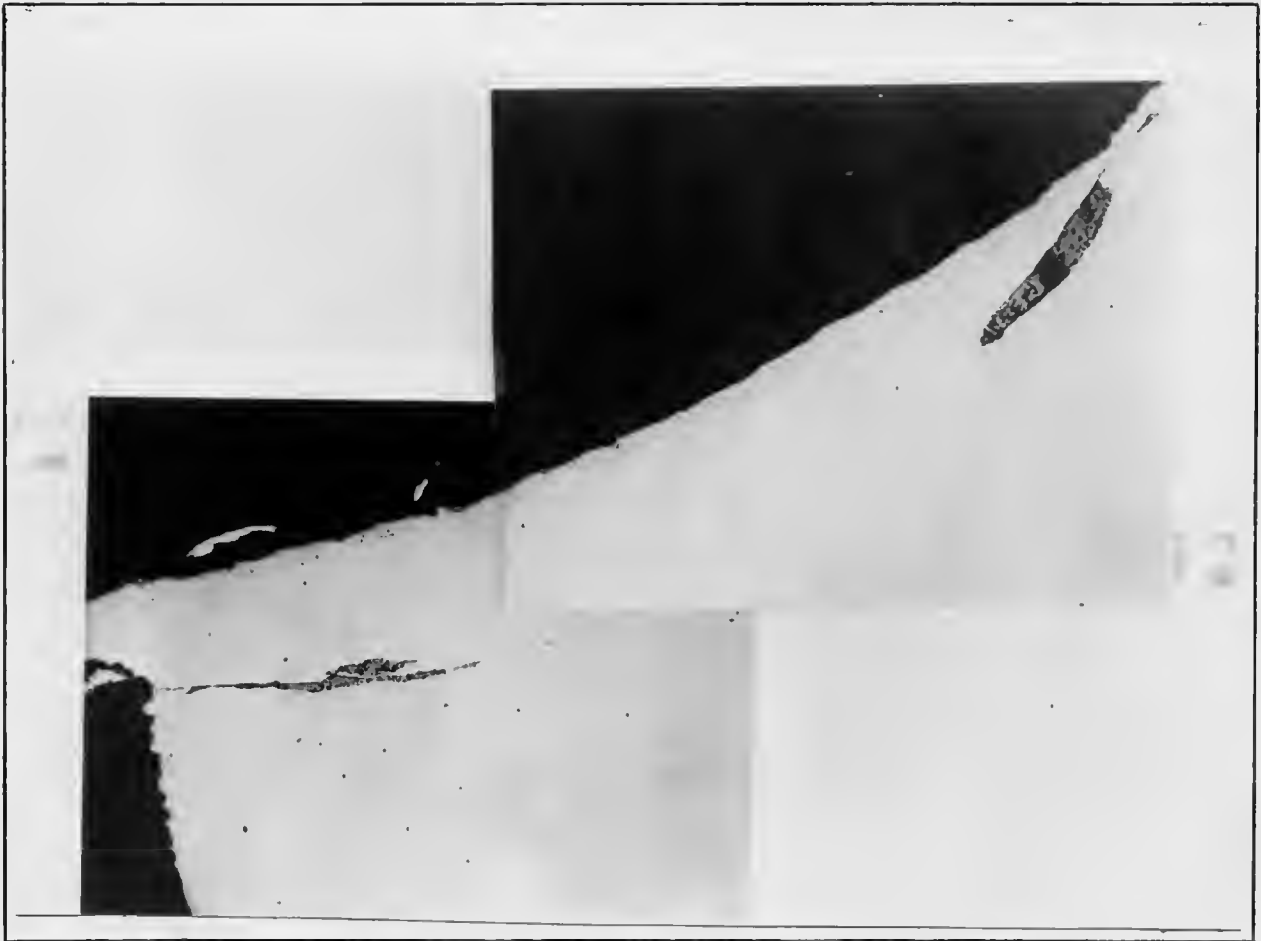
Portion of fracture surface (center about 10 inches from weld in rim base). A crack is visible (made visible by magnetic particle inspection) in the unfractured surface of the gutter. Approx. 1.2X
